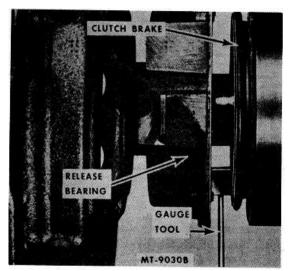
Checking Release Bearing Adjustment With Clutch Brake (Dana Angle Spring Clutch)
